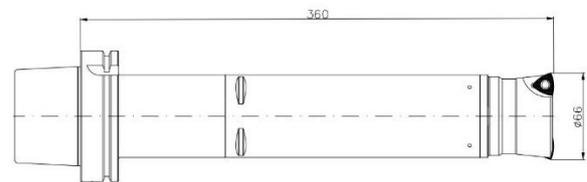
High Feed Tool with 4 inserts with 3 cutting edges
